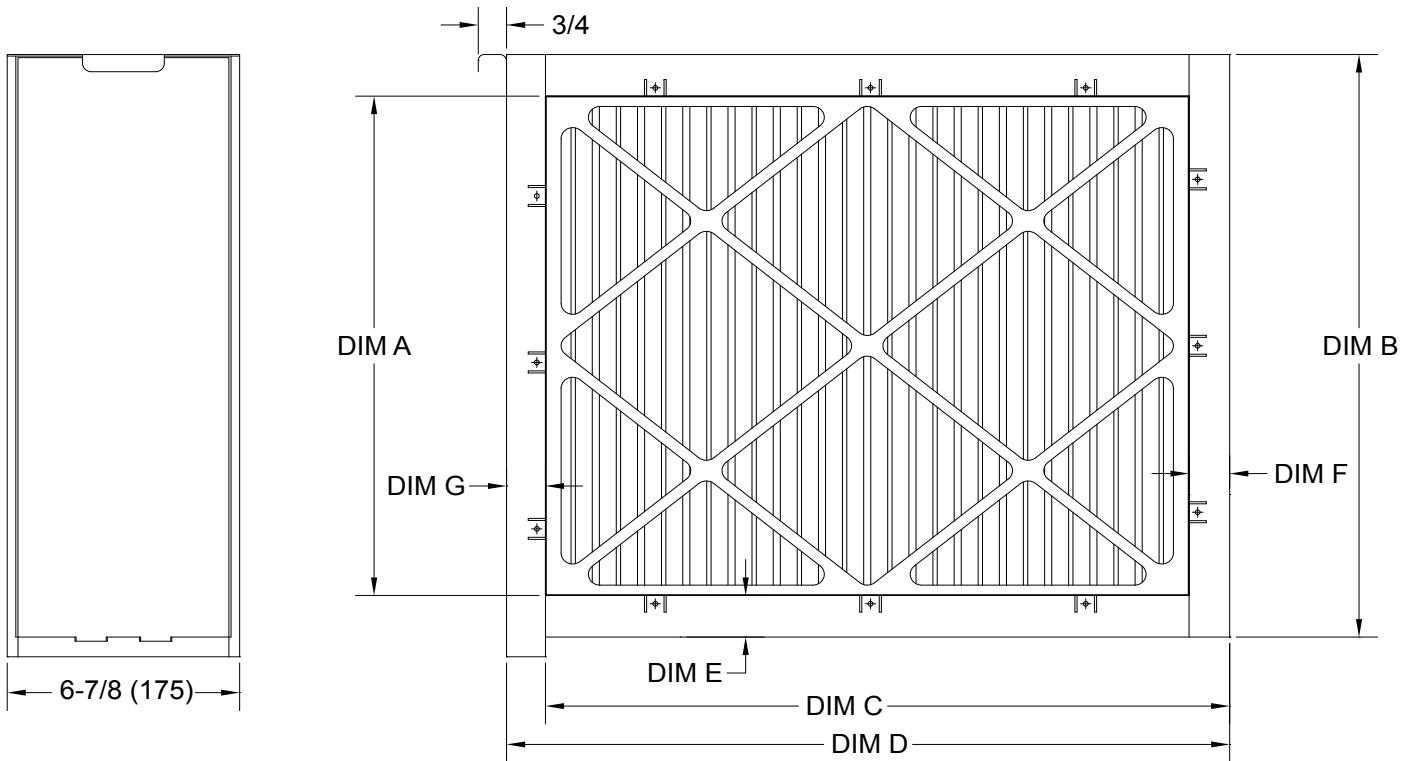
Installation dimensions in inches (mm) of air cleaner. See table below
